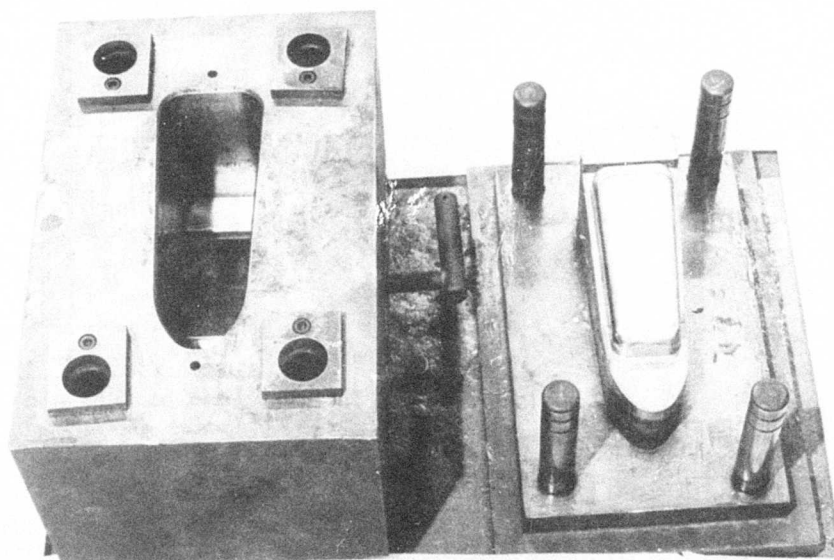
Matched-Die Steel Tooling for Idler Bell Crank.
